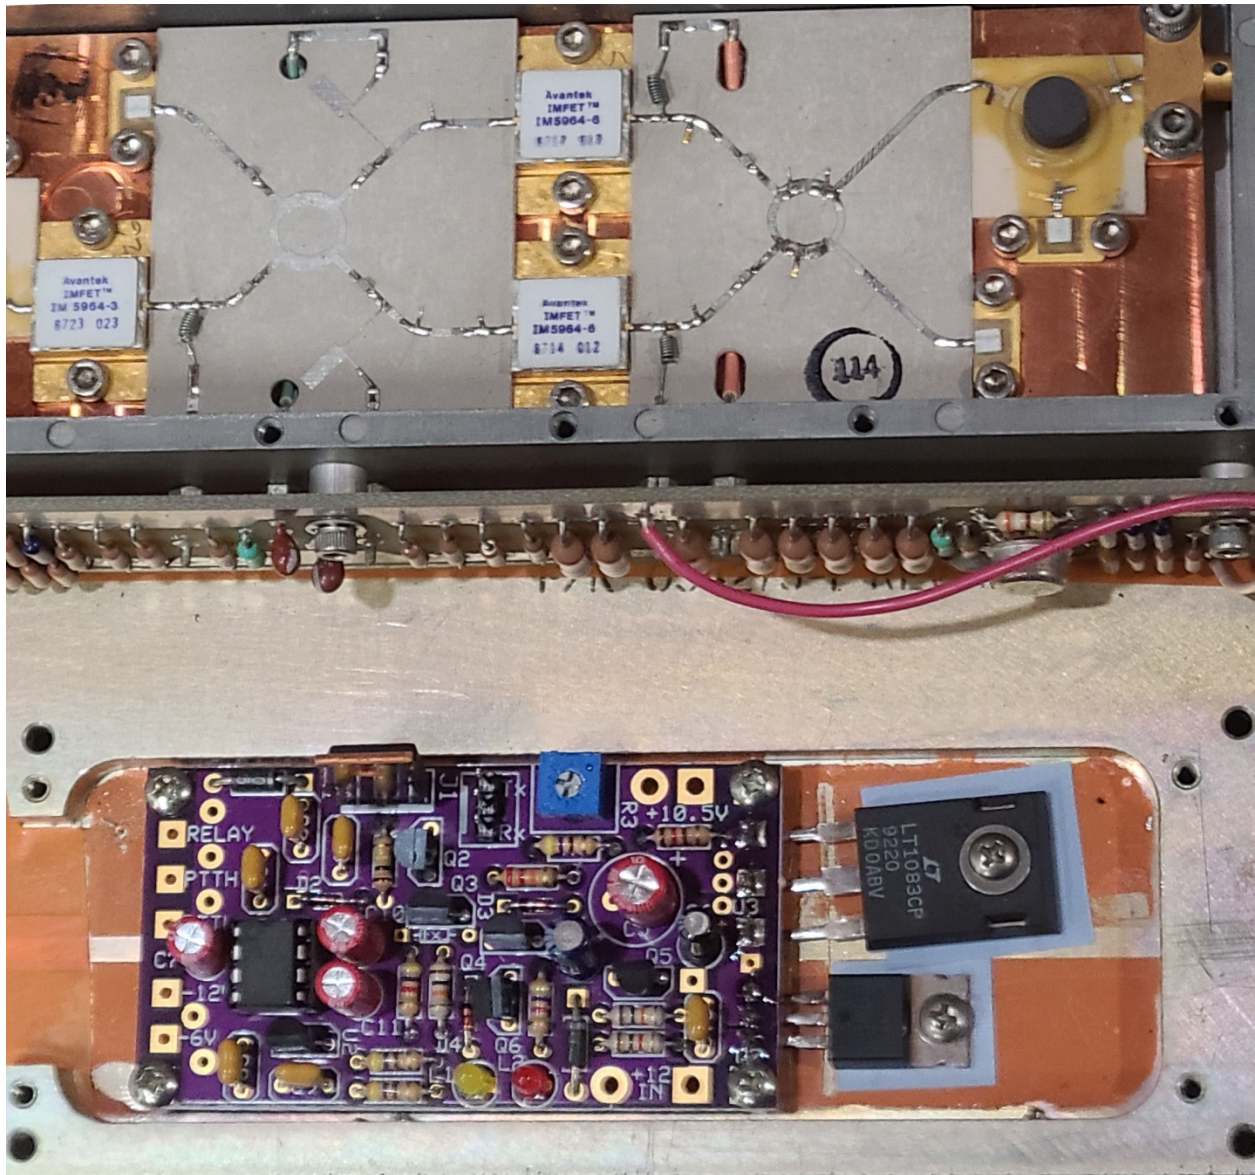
Power supply board mounted on amplifier heat sink ready for smoke test
